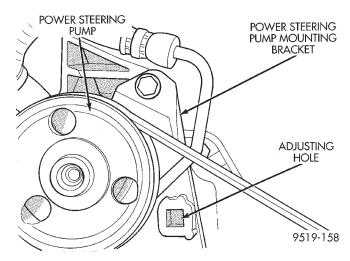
Power Steering Pump Front Mounting Bracket Adjusting Hole
